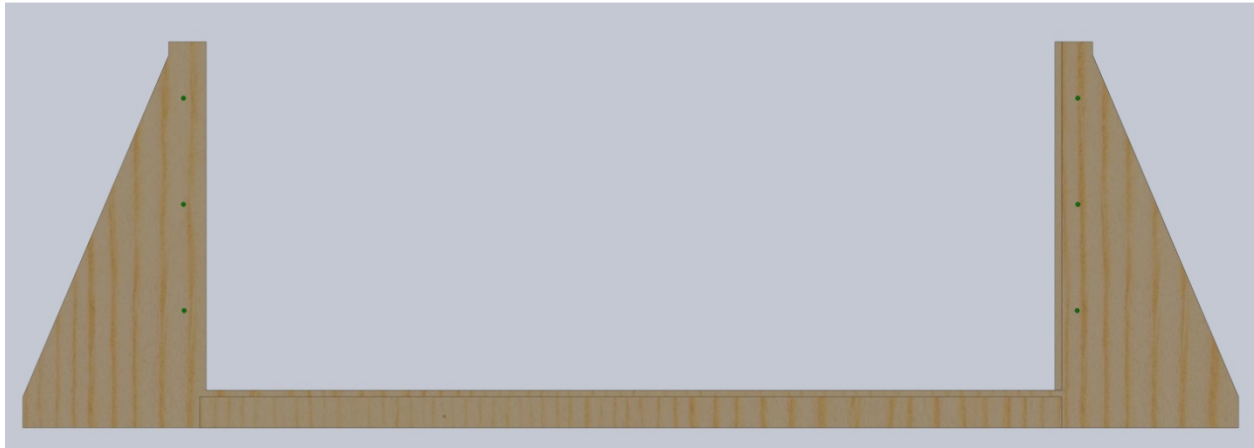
Side view of the last cross beam in a tank section. Holes are highlighted in green.
